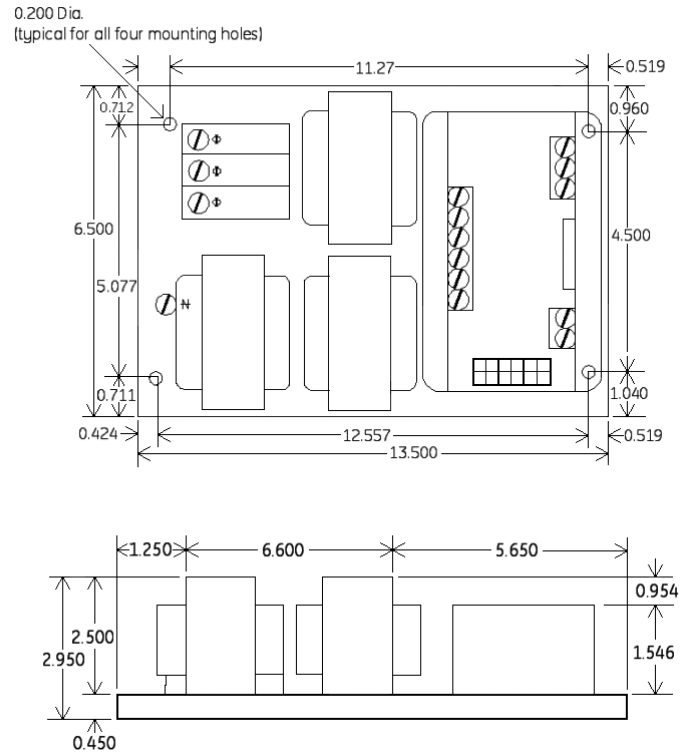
Dimensioned drawing of the Voltage Conditioner Plate (dimensions shown in inches).
